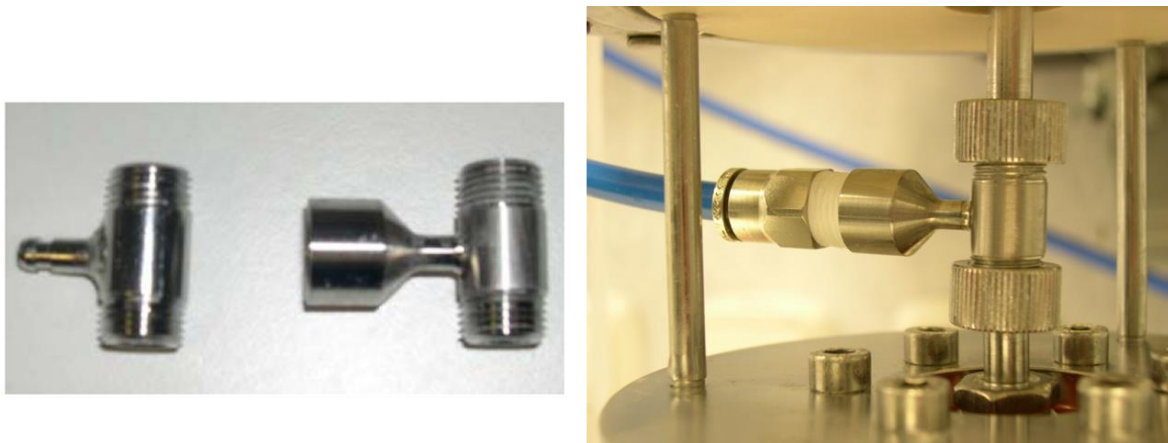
Modified T-piece to a welded steel screwed female adapter 1/8" GAS. Place where the T-piece is mounted.
